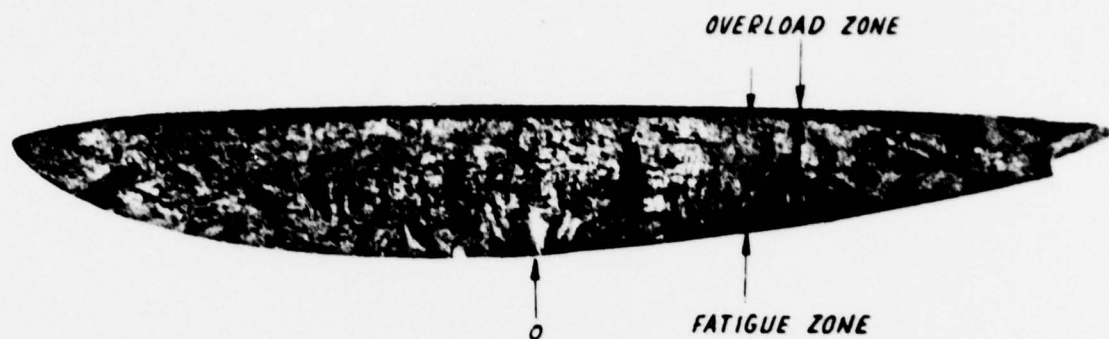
PROPELLER FAILURE INITIATING AT CORROSION ATTACK
